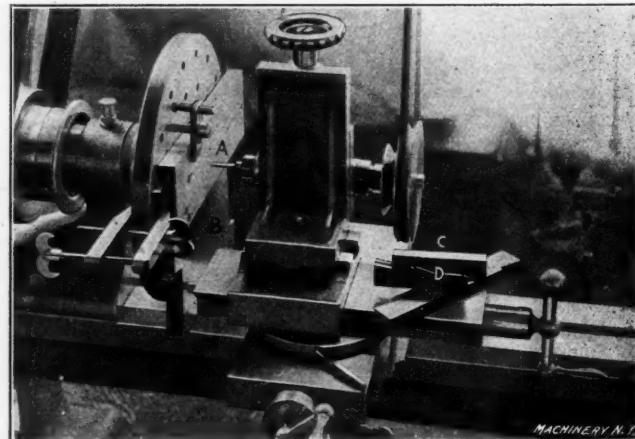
Method of Laying out and Boring Jig Plates in the Elgin Tool Works
